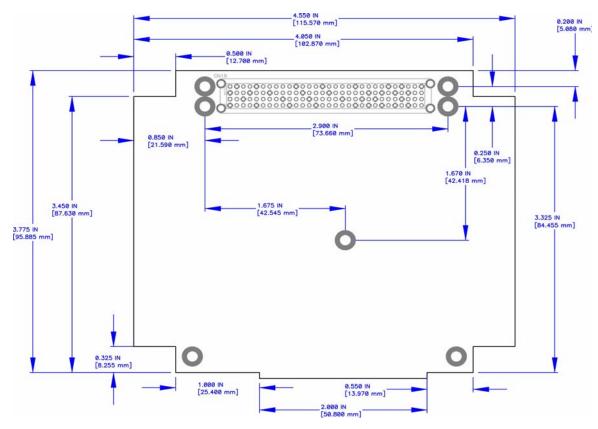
CMX158886 Physical Dimensions (±0.005 inches)
